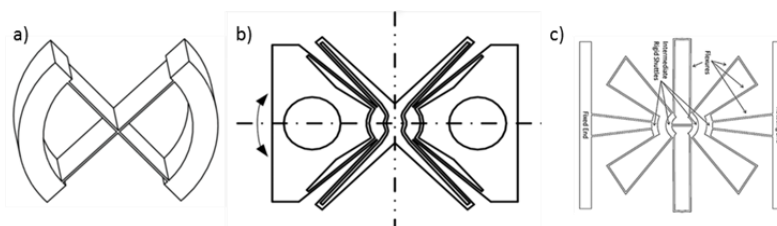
Compliant hinges: a) Cartwheel hinge b) Butterfly hinge c) Flex-16 hinge [13]
